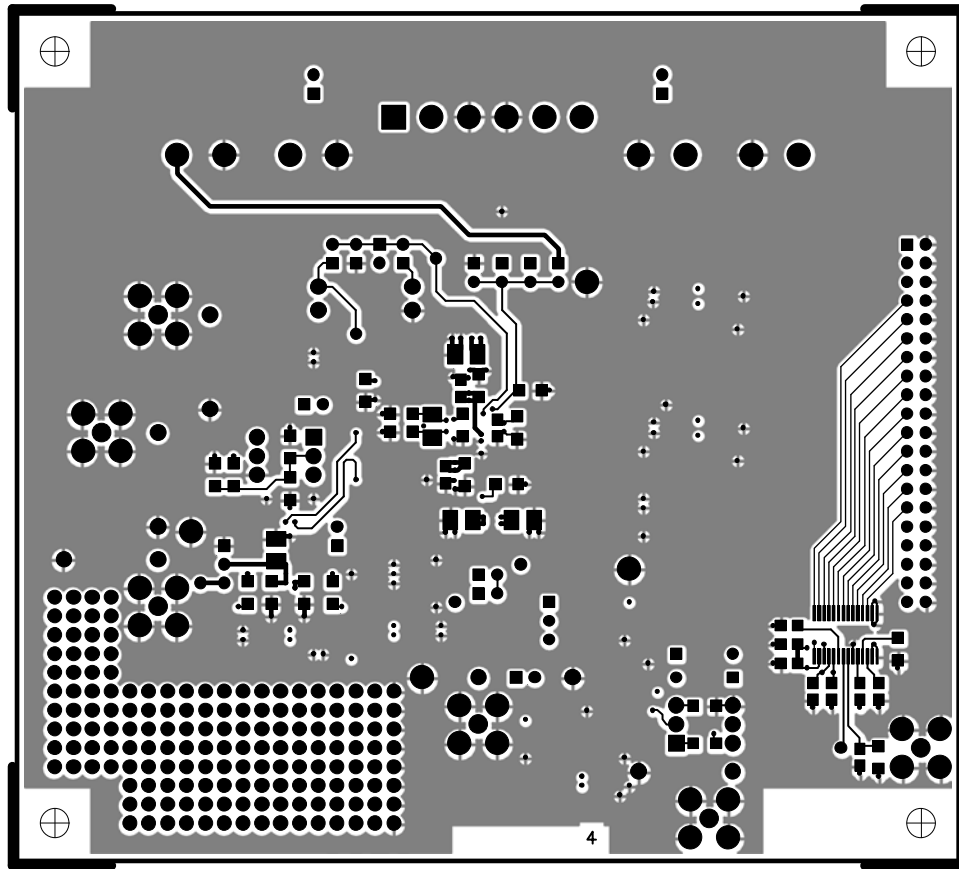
TSSOP Evaluation Board Layout, Secondary Side
